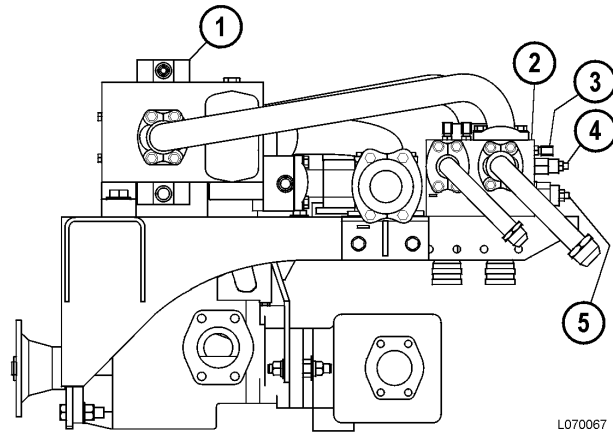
COUNTERBALANCE VALVE ADJUSTMENT
